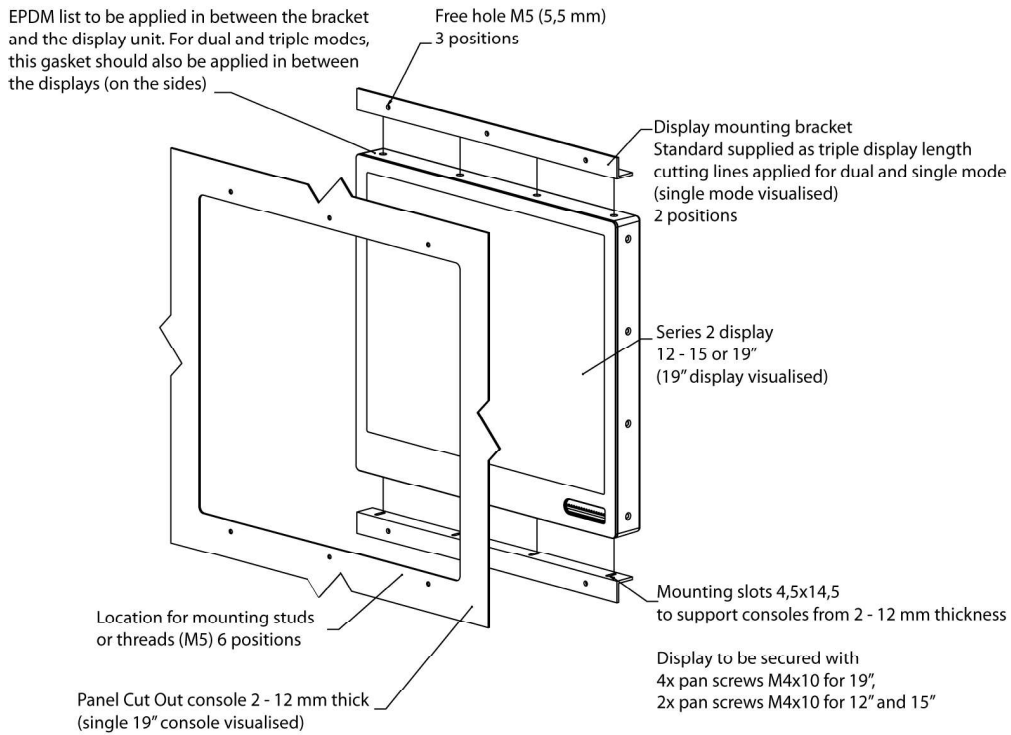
19" TFT Hatteland HD19T03 MMD Console Bracket View
